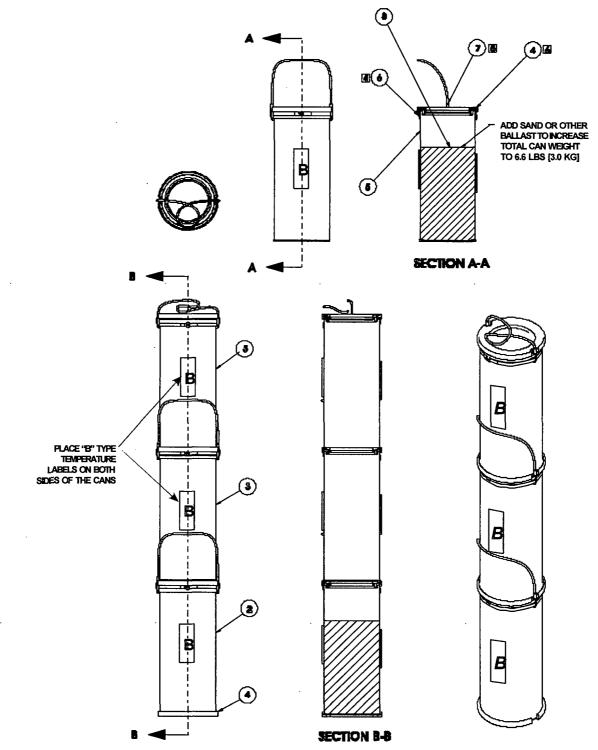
Light-weight test assembly temperature-indicating label locations
